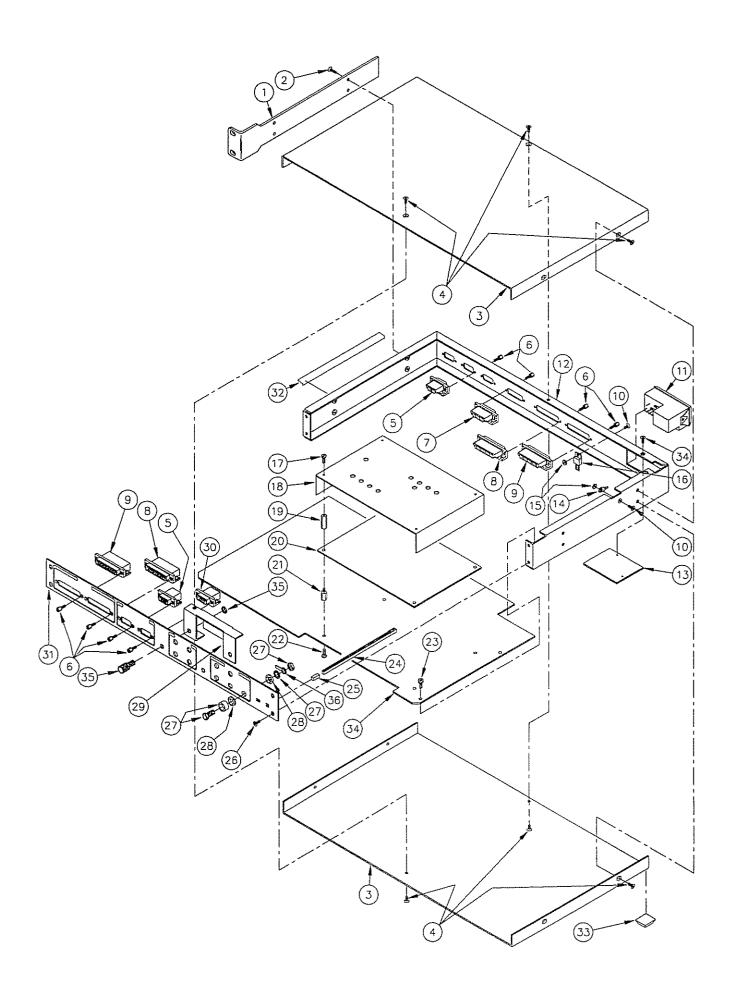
DCX-127 MULTIFUNCTION MODULE ASSEMBLY
